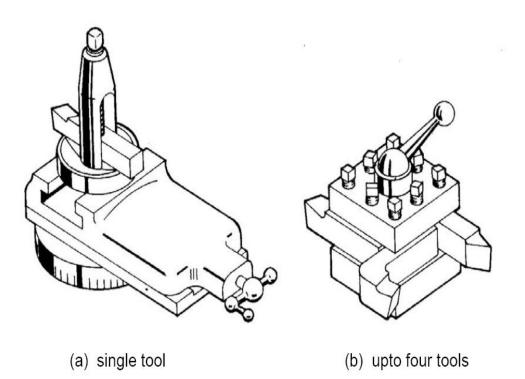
Mounting of shank type lathe tools in tool posts.
